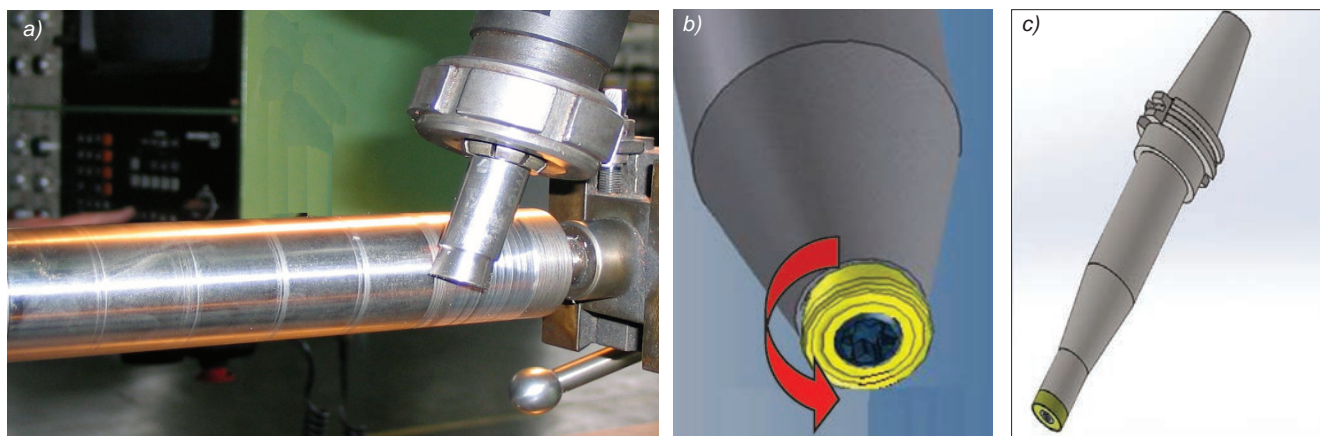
Machining carried out on a milling machine using a face rotary turning tool and a special attachment: a) a uniform face rotary turning tool, b) a face rotary turning tool with replaceable insert, c) tool holder with a conical mandrel
